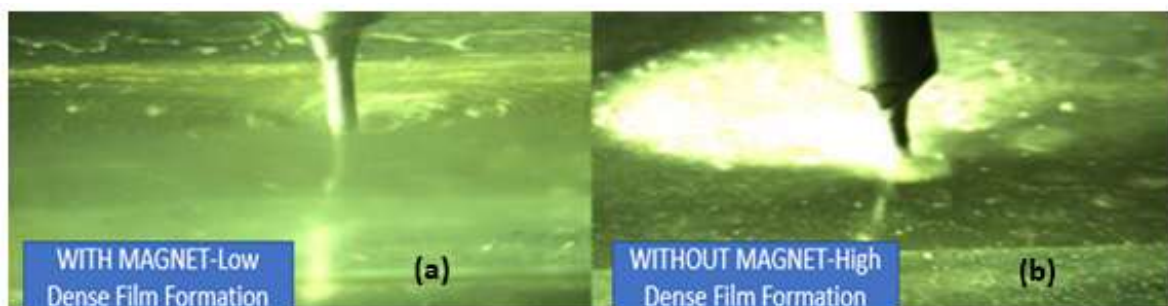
Magnetic field configuration: (a) with magnet assembly installed; (b) without magnet assembly.
